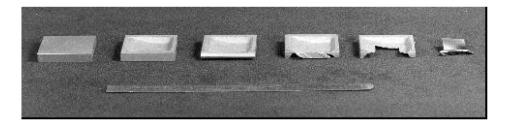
Early efforts to produce small compressor vanes in TiAl. The picture is showing AE3007 14th stage compressor blades manufactured by ECM using production tooling
